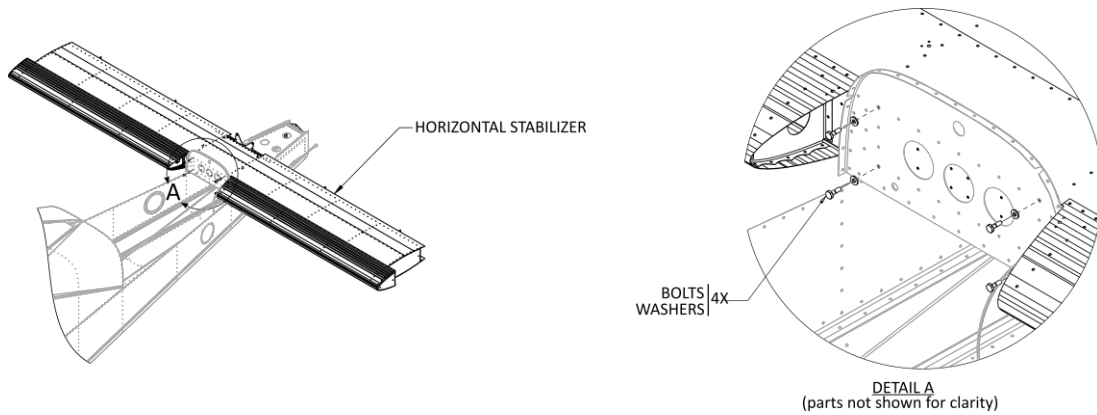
Horizontal stabilizer front spar detachment.
